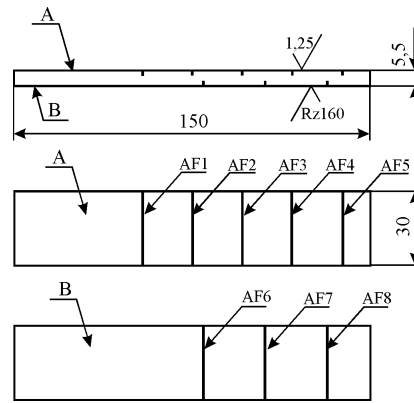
Specimen for EDDYLINE type EC probe investigations.
